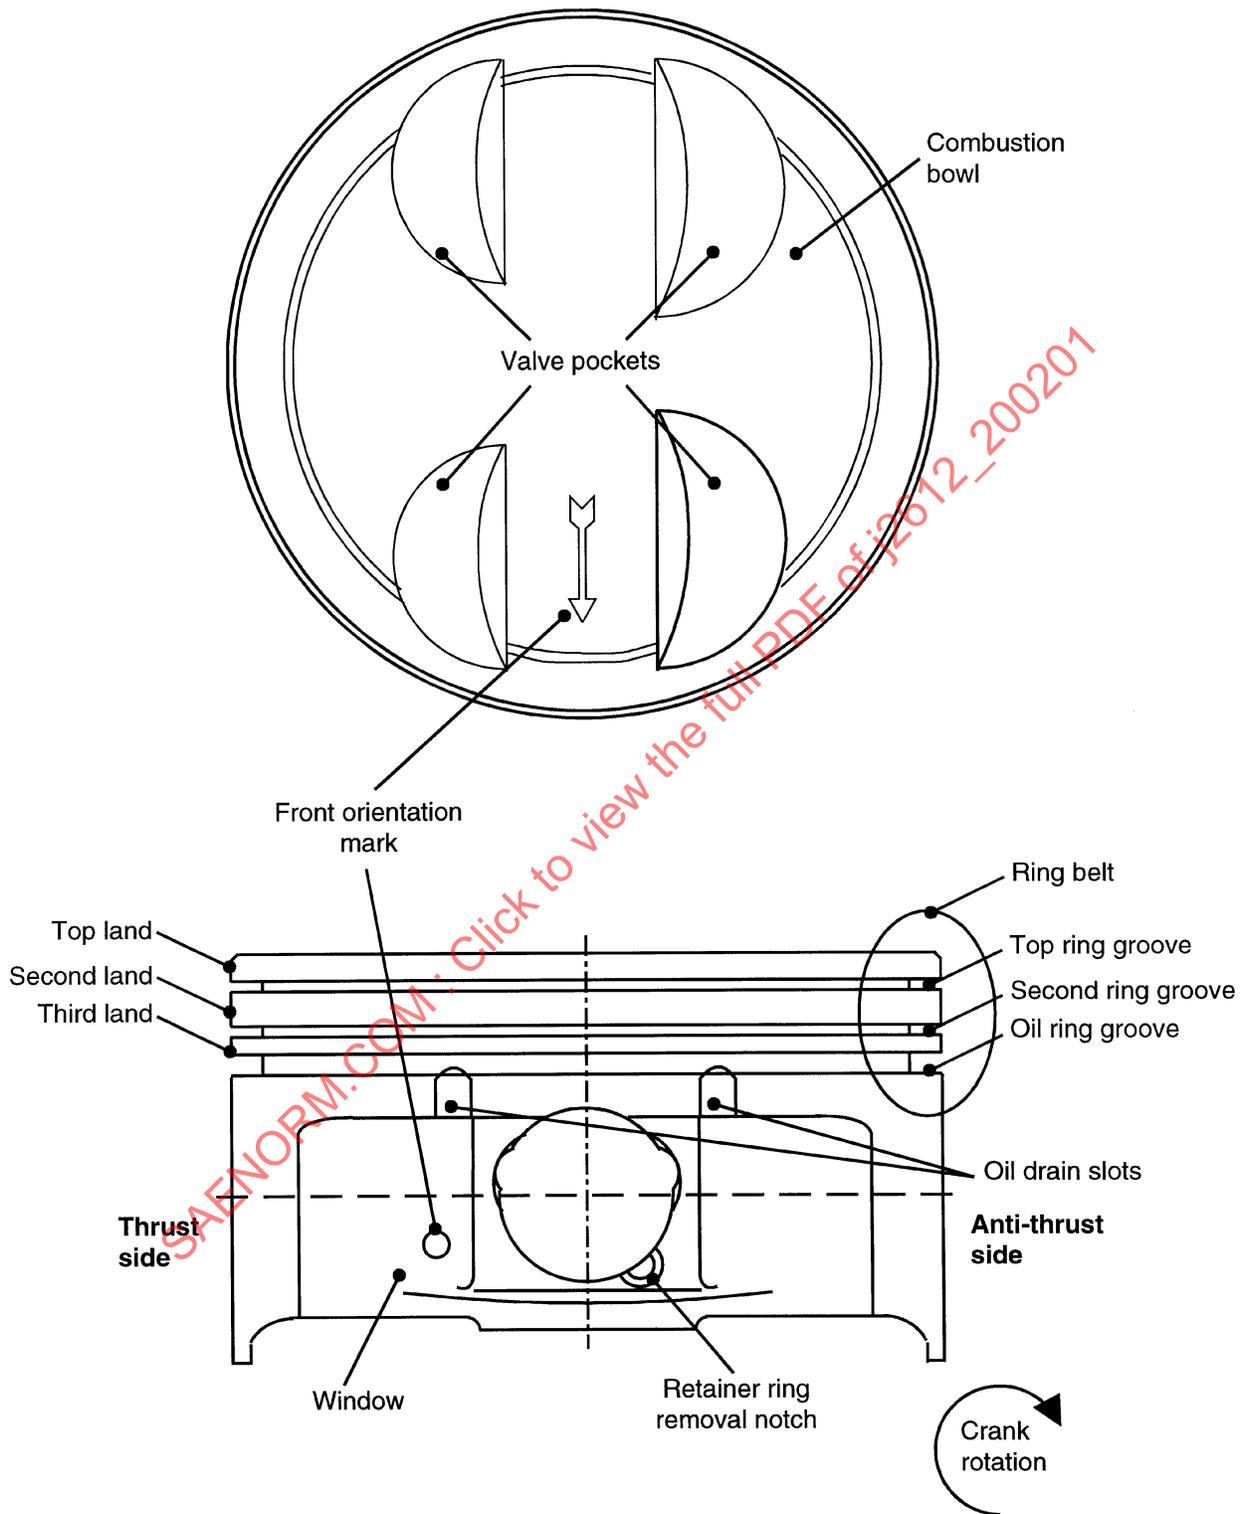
LIGHT DUTY MONOBLOCK PISTON — TOP AND SIDE VIEW
